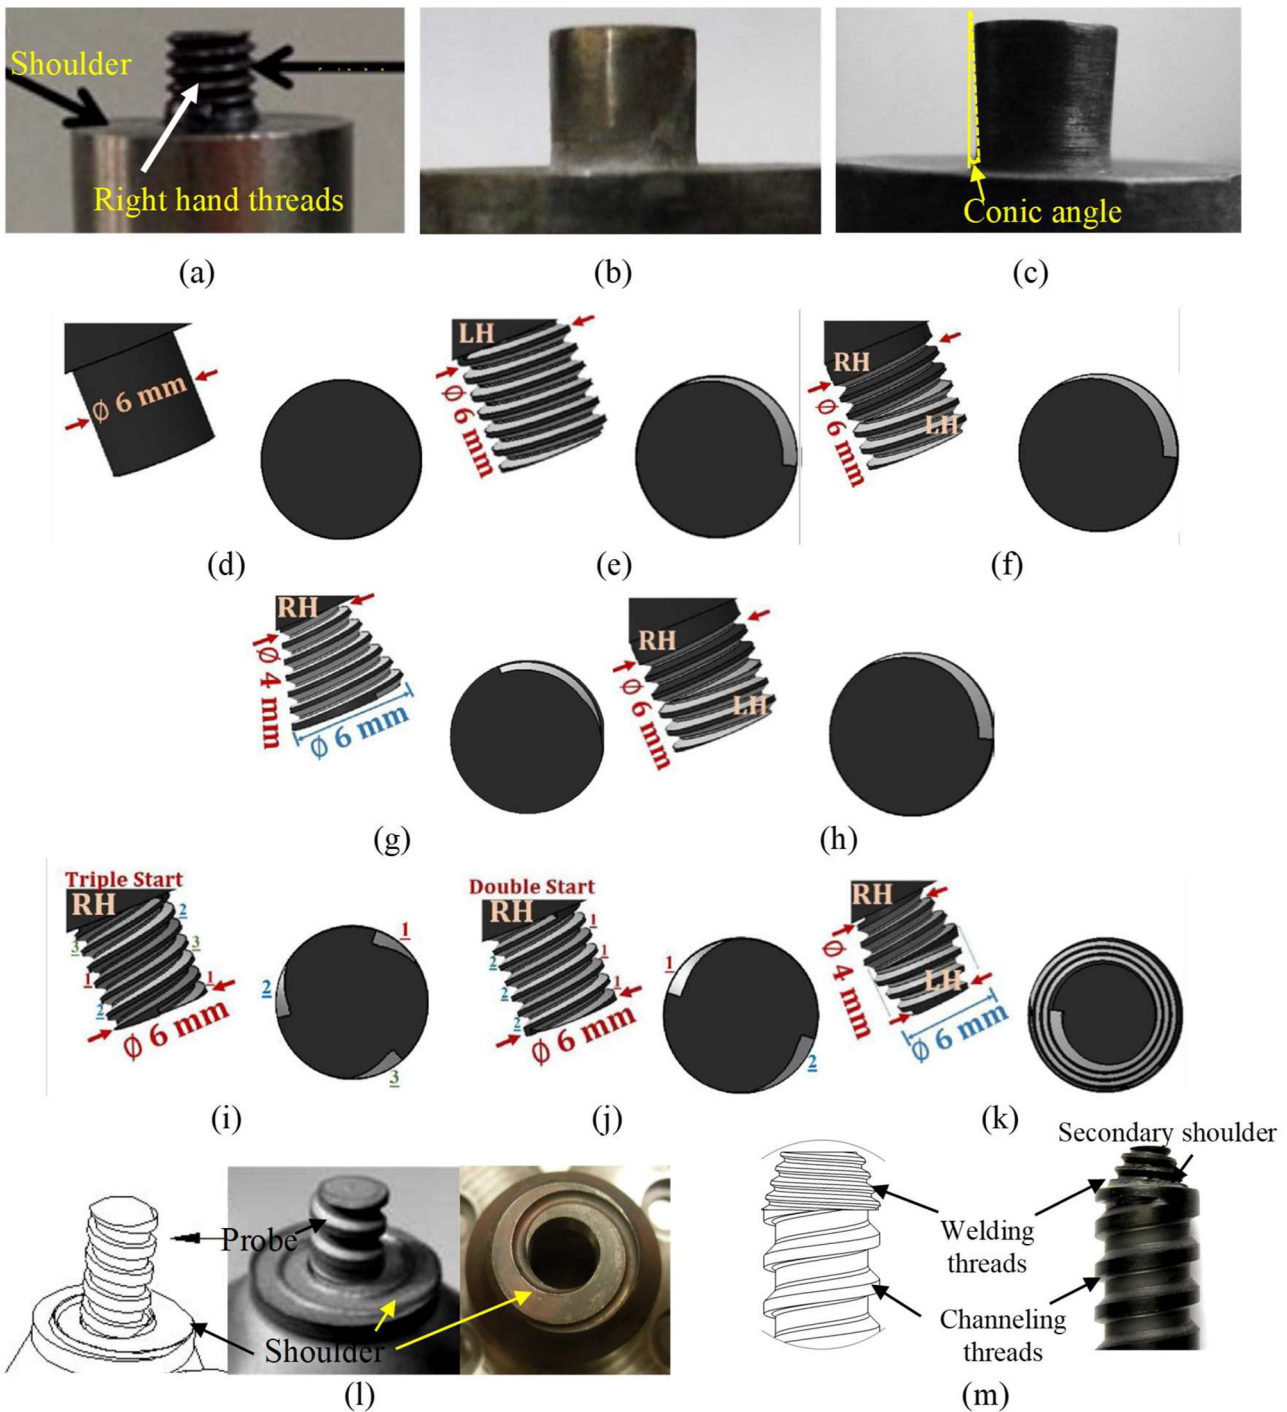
Tool design for friction stir-based channeling (a)^[70] FSC with shoulder-workpiece clearance, (b, c) FSC with tilt angle and toe flash,^[74] (d–k) various features of probe used in Ref. [71] (l) FSC without shoulder-workpiece clearance^[51,76] and (m) HFSC.^[51]
